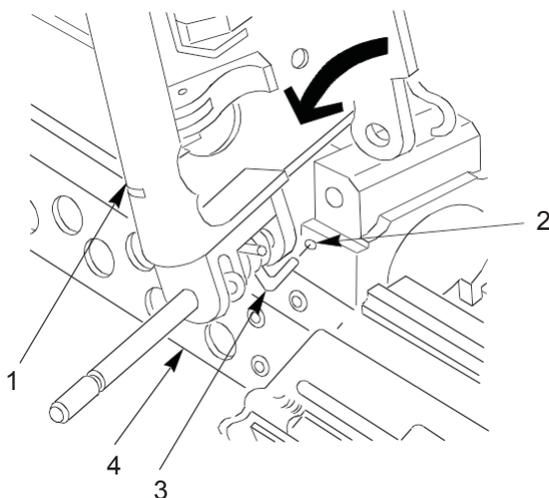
Feed Mechanism Assembly, Receiver Assembly, Freeing Torsion Spring.
